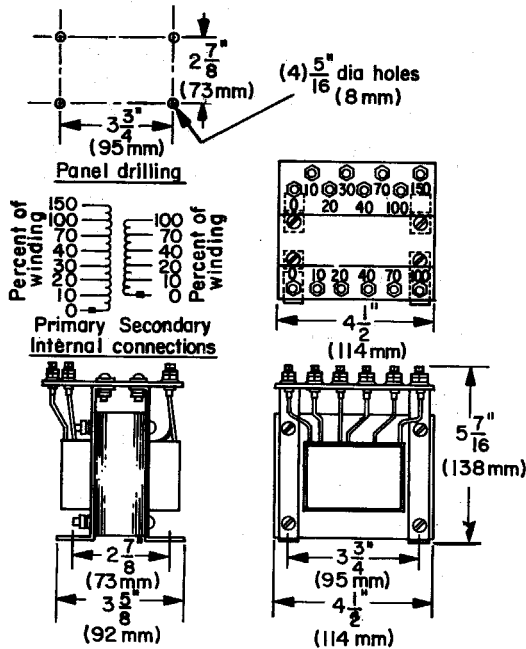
Auxiliary transformer (for use with type GCXG51A Relays)
